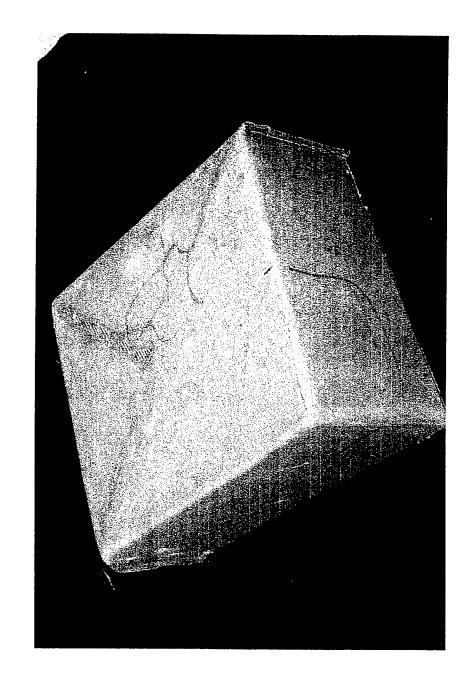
The 10-ply Part Fabricated on the Male Mold.
